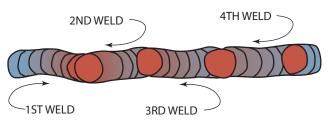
Improper welding technique for filler metal resulting in lack of fusion.
